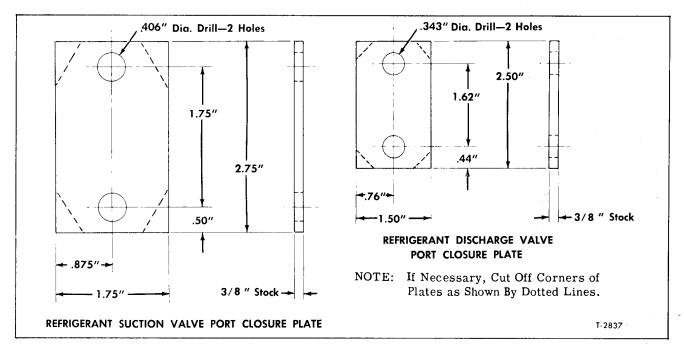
Closure Plates For Sealing Compressor Valve Ports
